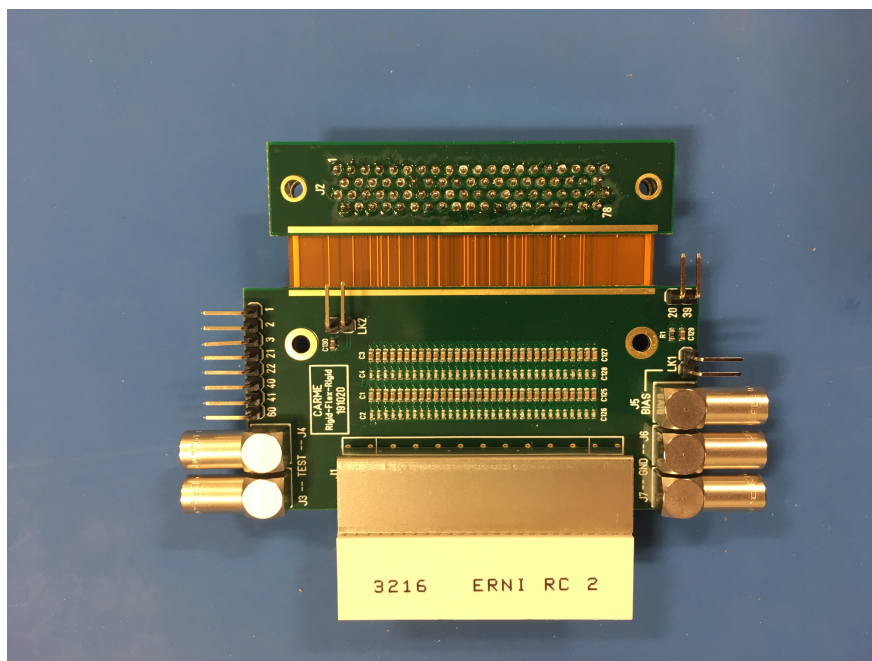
Adaptor board for connecting FEE module to feed-through flanges. Top of adaptor board plugs into feed-through flange, ERNI connector provides connection to FEE module. LEMO connections provide connection for $2 \times$ test inputs (bottom left - J3 and J4), bias (top right - J5) and $2 \times$ grounding (bottom right - J6 and J7). Jumper pins (lk1 and lk2) allow for further grounding
